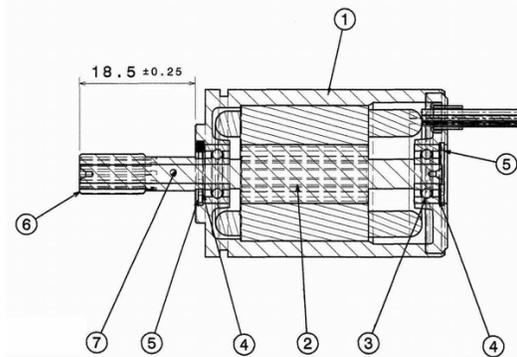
Stepper motor 1116112 (all dimensions in mm).
